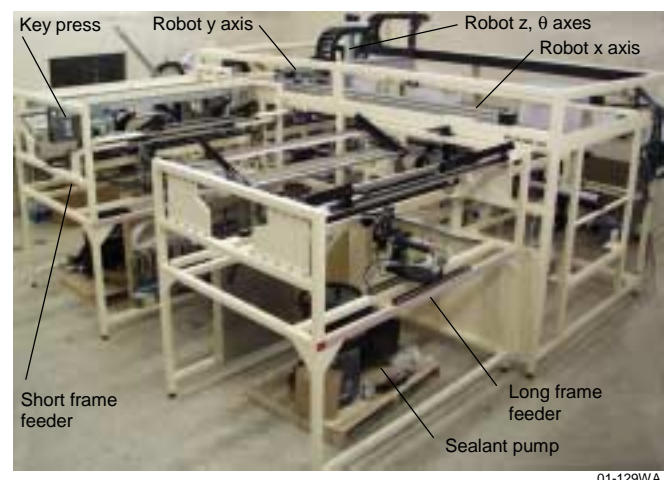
SPI-FRAME™ 350 module edge sealer and framer during assembly. The frame press and robot end-effector are located in the main section at rear.
